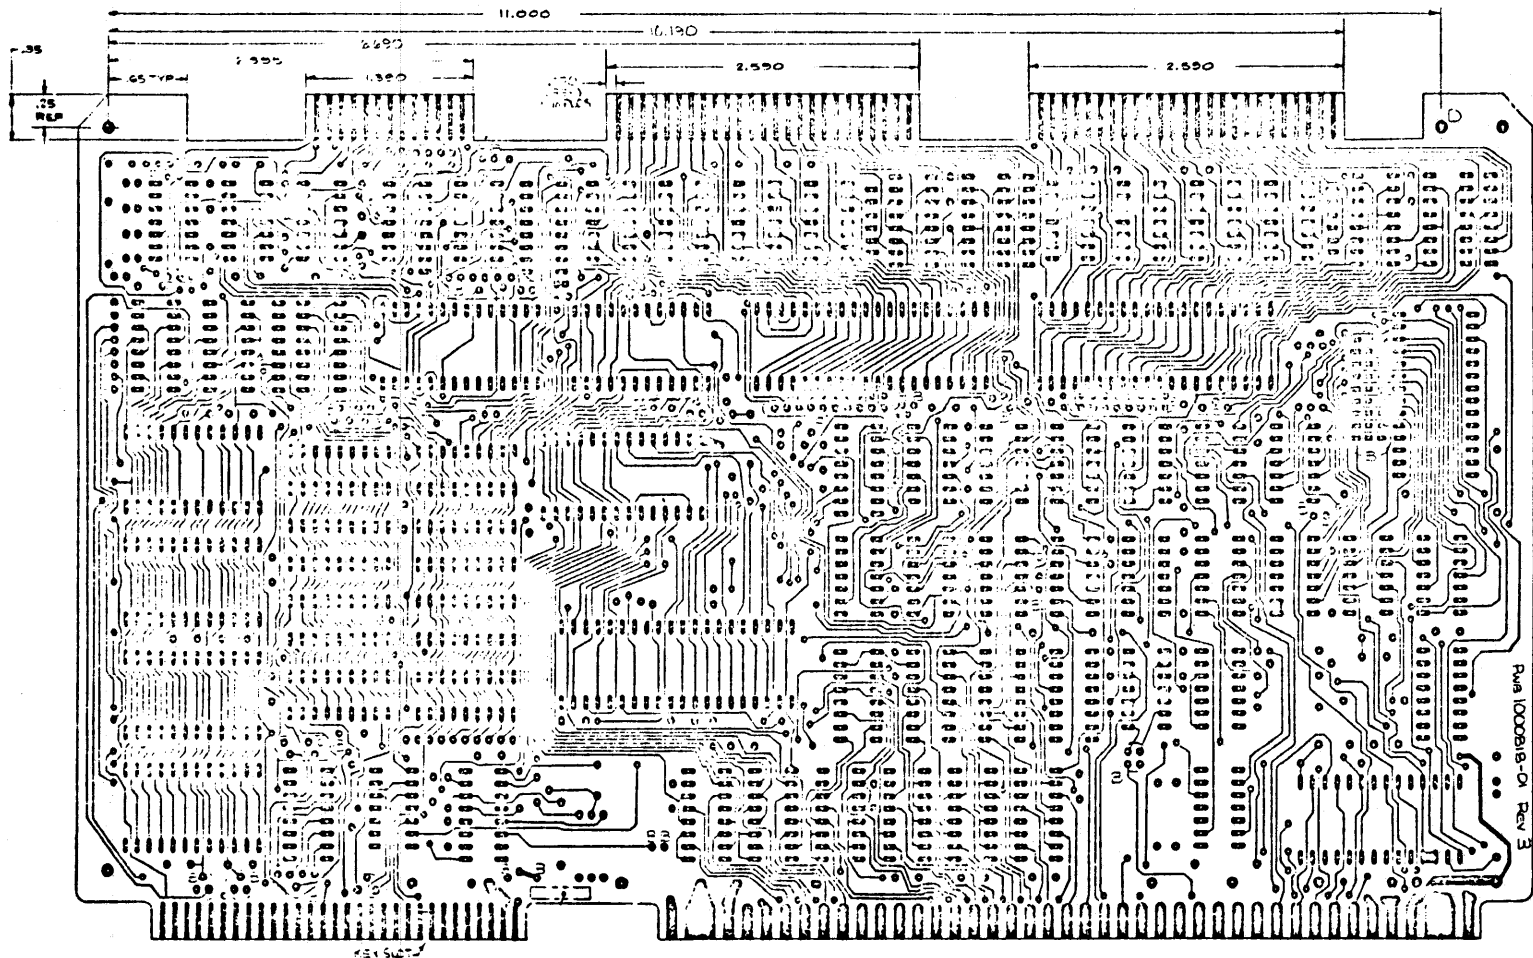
SBC 80/20 AND 80/20-4 BOARD OUTLINE (1 of 2 sheets)
